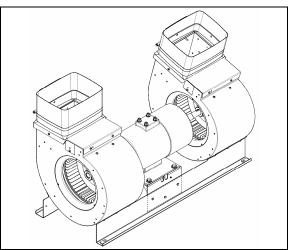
EVAPORATOR MOTOR ASSEMBLY 22316
